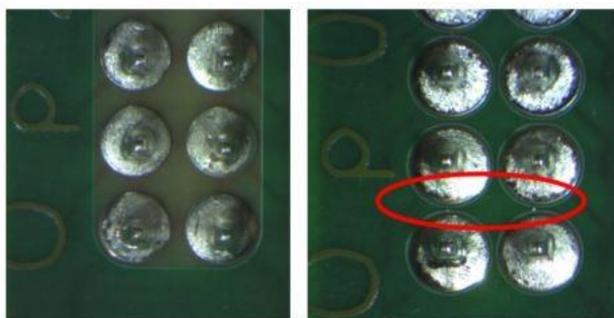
Left the solder mask removed, right with solder mask and solder ball.
